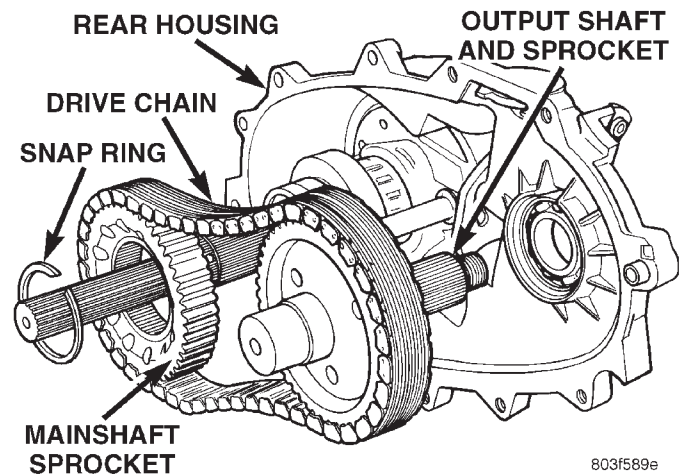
Front Output Shaft, Drive Gear And Chain Removal
